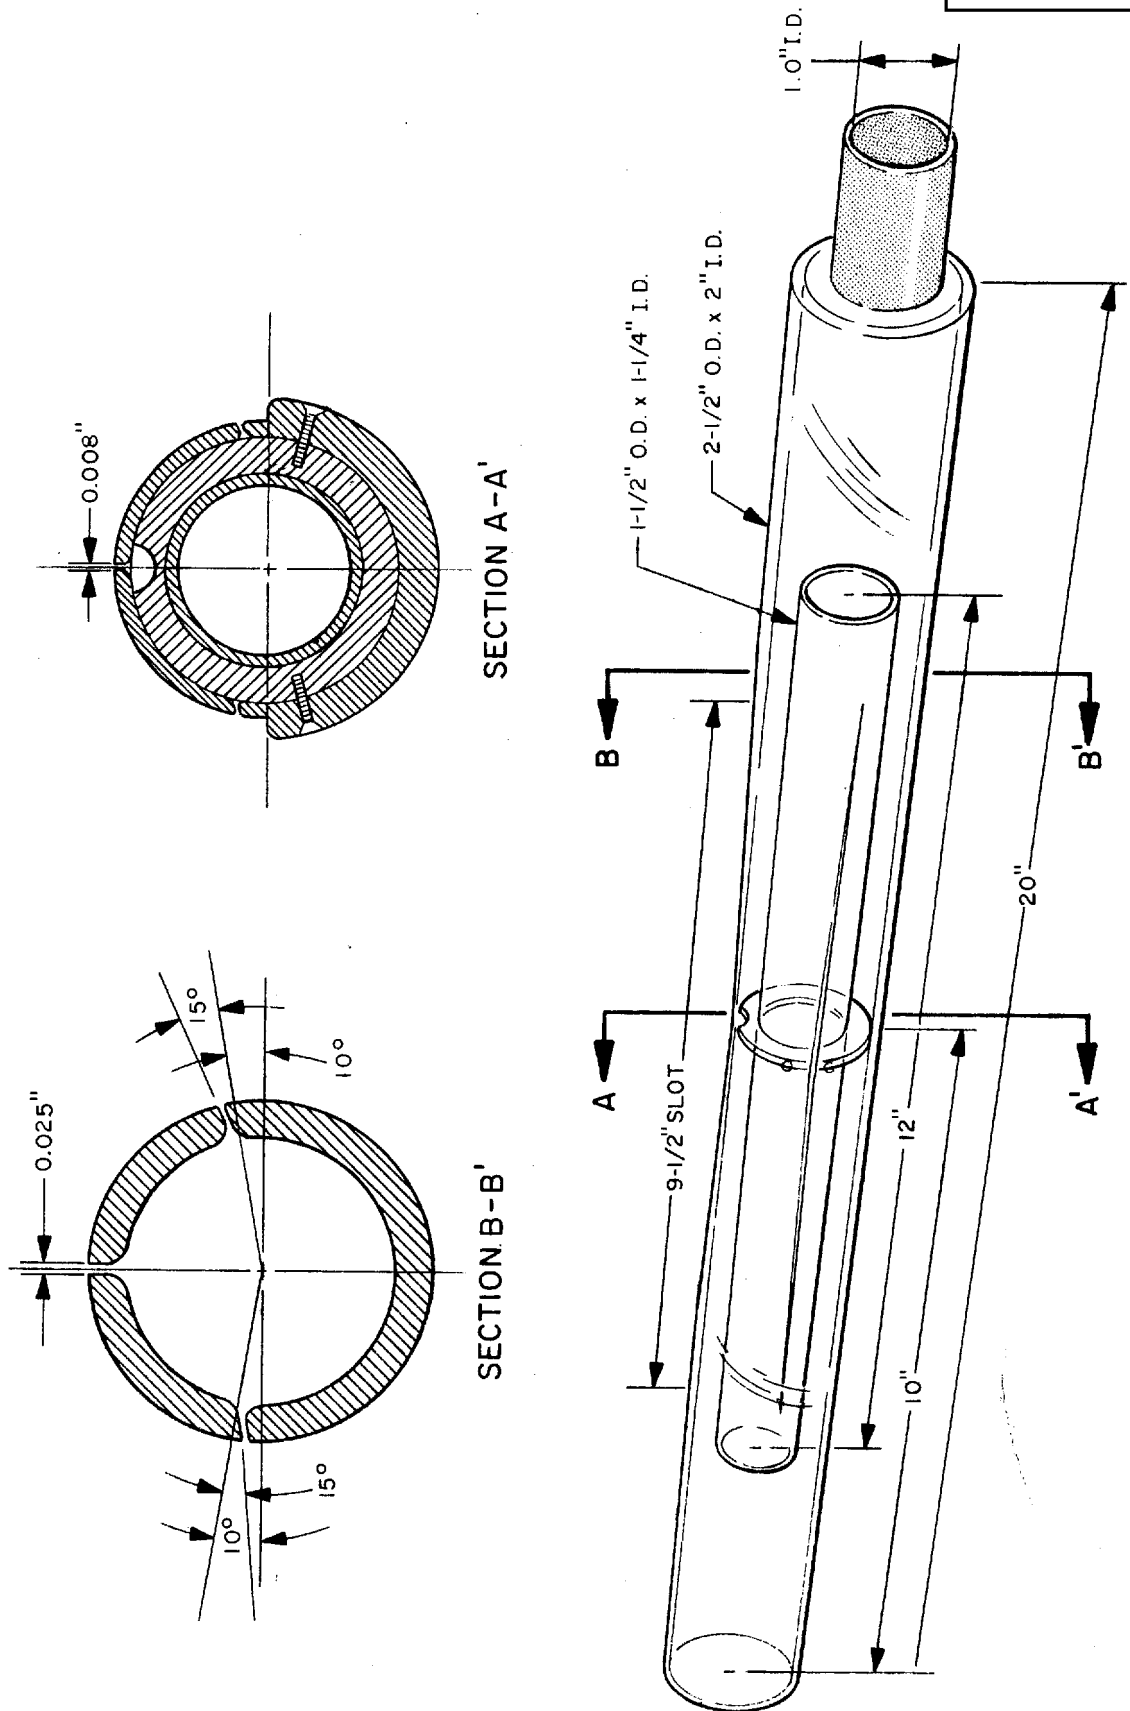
Cutaway Showing Construction of Methacrylate Tapered-Slot, Self-Centering Bearing
